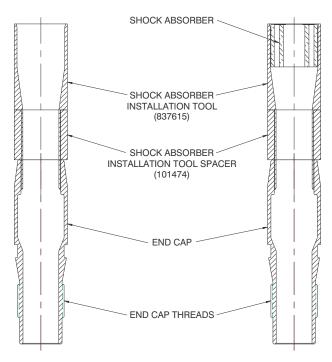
End Cap, Spacer 101474, and Tool 837615 in Press
